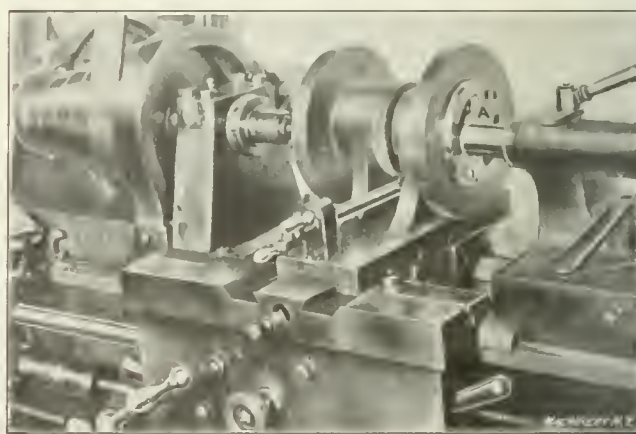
Master Cam and Guide Roller used when Milling Belt Shifter Cams
